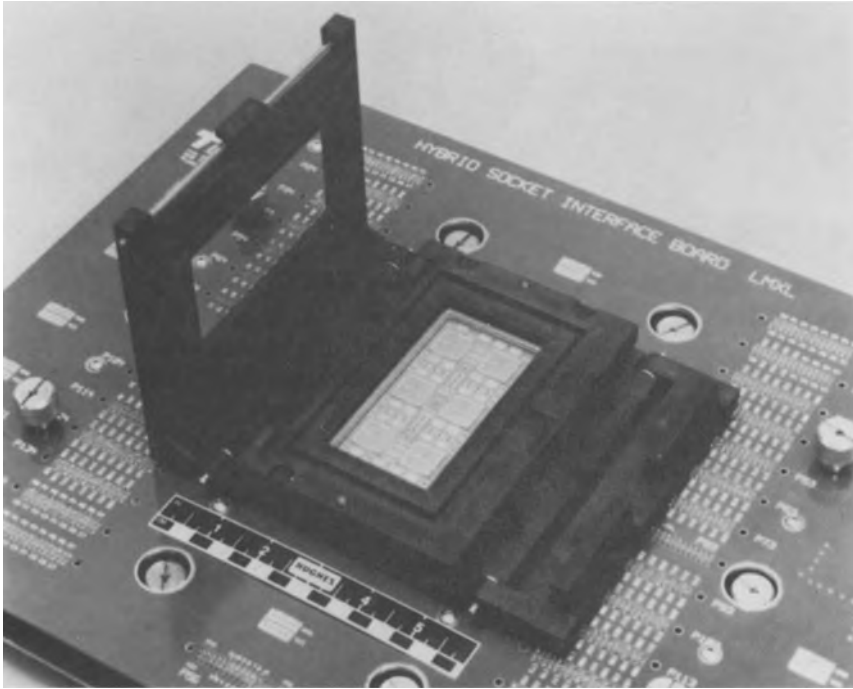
HDMI module in carrier and test socket on DUT board (fine pitch, 368 lead electrical test fixture).
